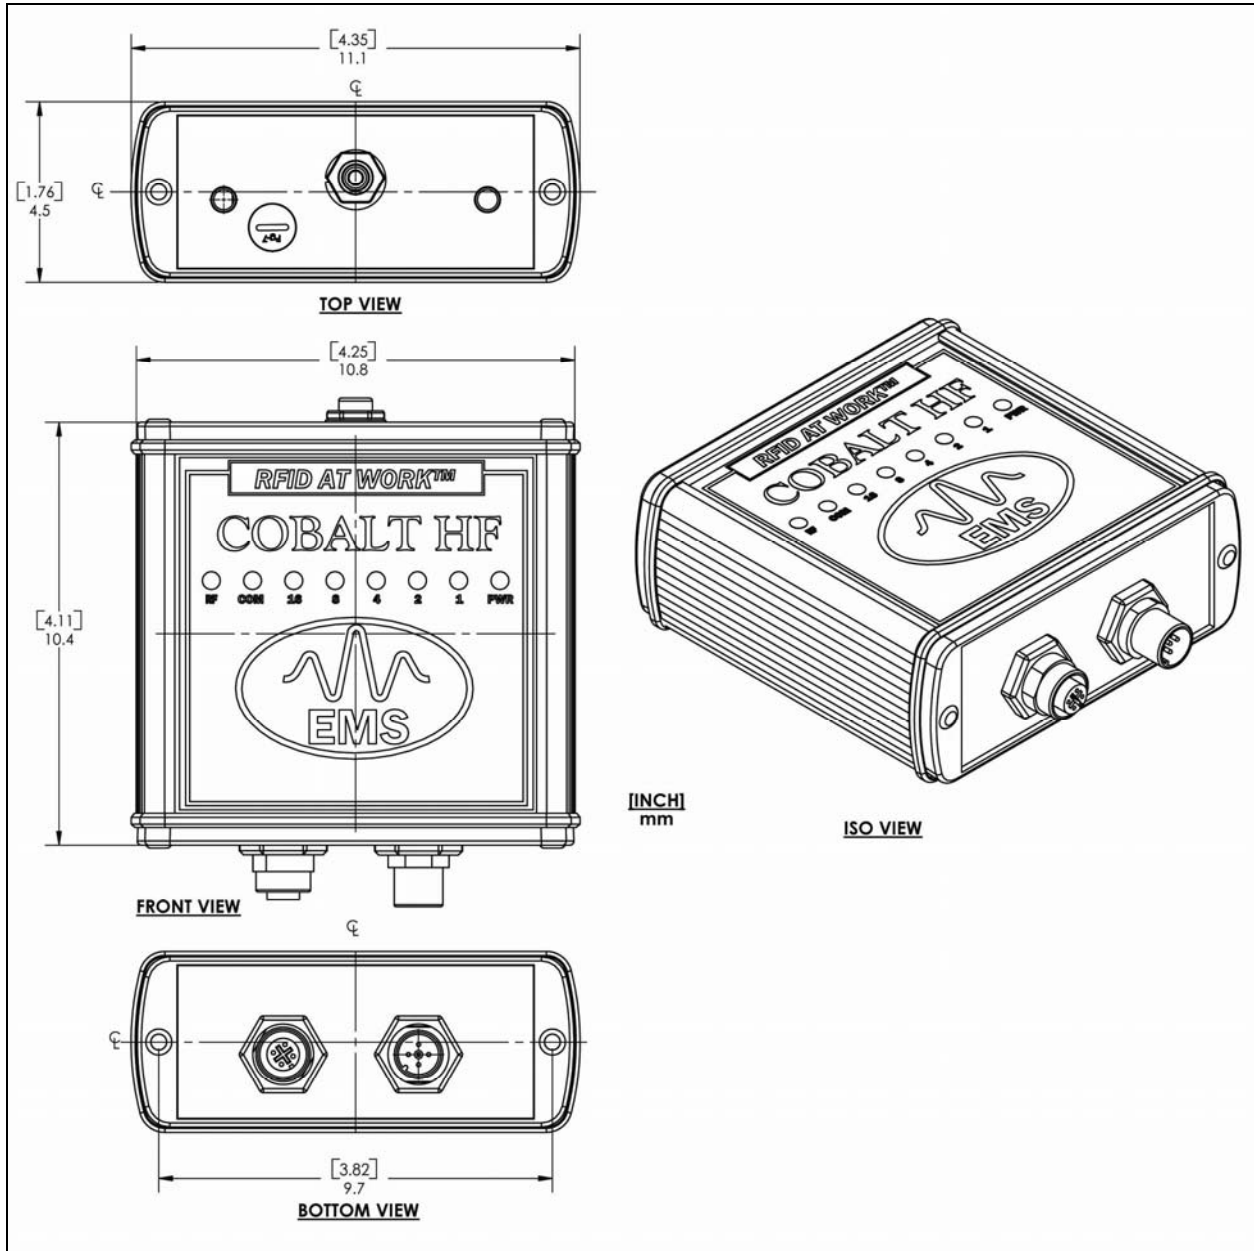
HF-CNTL-USB/IND-01 Dimensions
